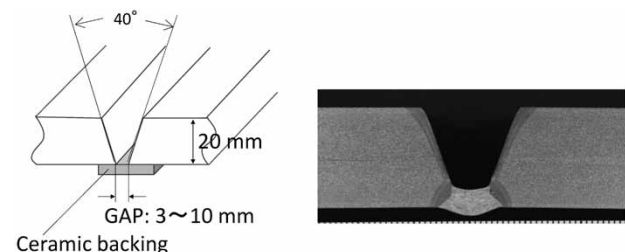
MAG penetration welding with ceramic backing material
